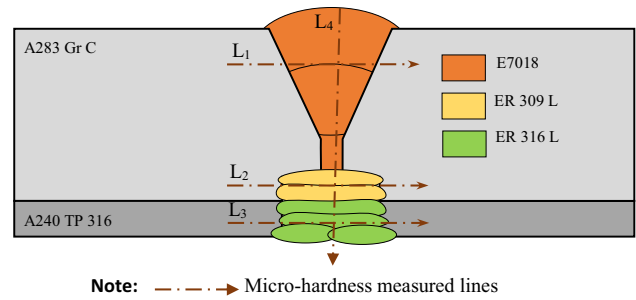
Micro-hardness measurement paths on the welded specimen
